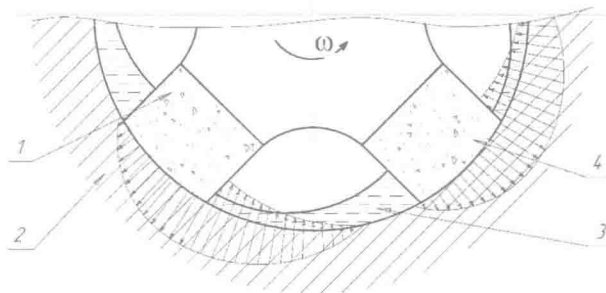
The scheme of heat transfer between the abrasive segments, the workpiece and the cutting fluid
